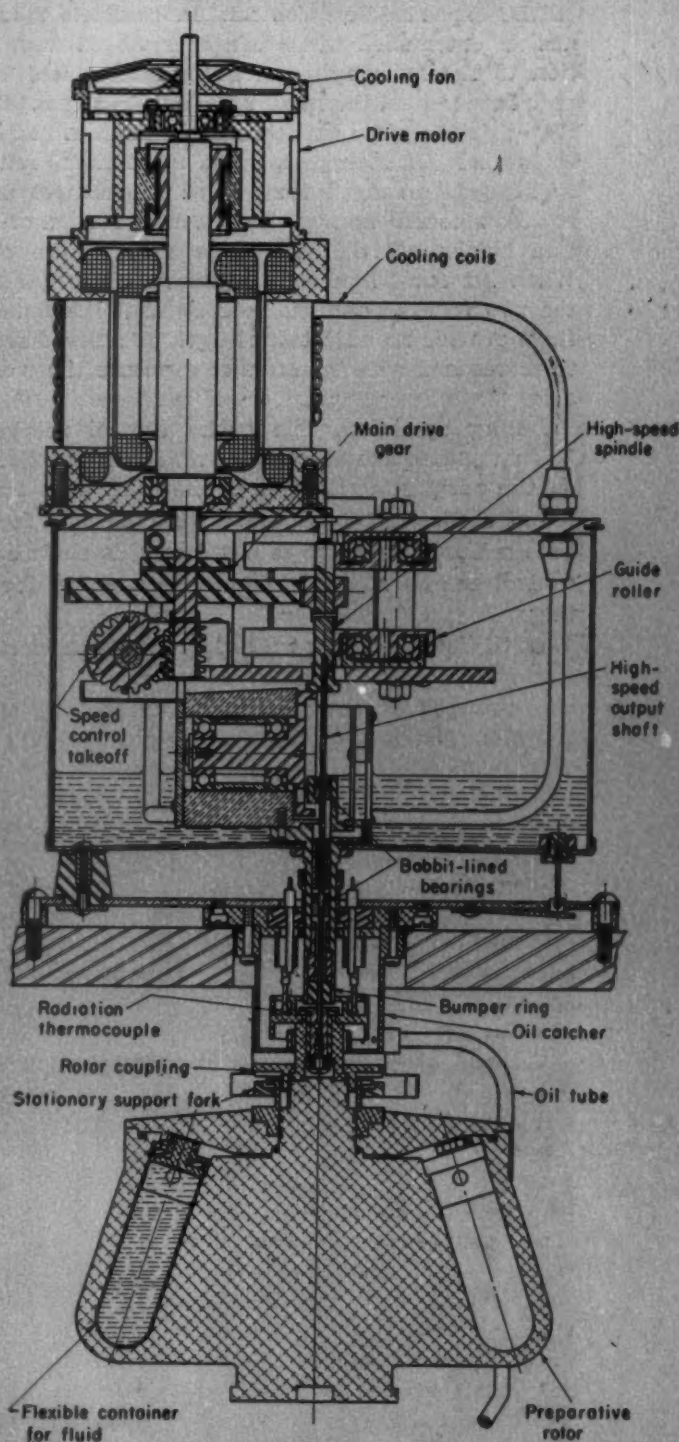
Section through electromechanical drive of centrifuge. Preparative rotor illustrated is interchangeable with analytical rotor shown in Fig. 4. Tube for light passage through drive is not shown
